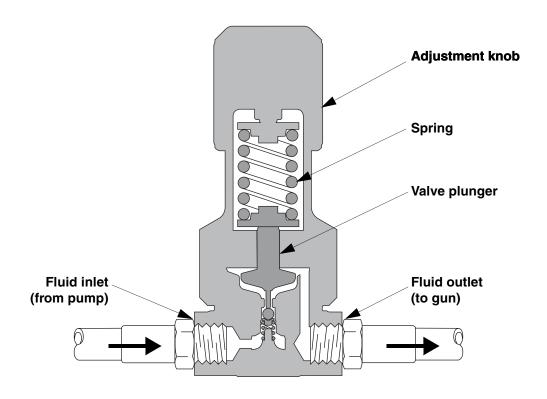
Cutaway of Mechanical Back Pressure Regulator
